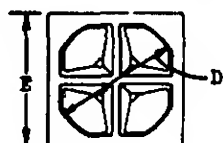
DRIVING HEADS & FILLERS - MODEL 440 LINK-BELT SPEEDER DIESEL PILE HAMMER
